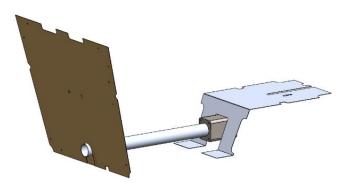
Driveshaft Protection Redesign with Lower Firewall (left), Driveshaft Cover (Center) and False Floor (Right)
